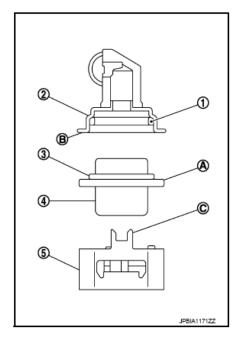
Identifying Fuel Damper And Sub-Tube Related Components Courtesy of NISSAN NORTH AMERICA, INC.
